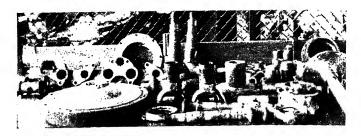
Automobile parts reclaimed by bronze-surfacing.
